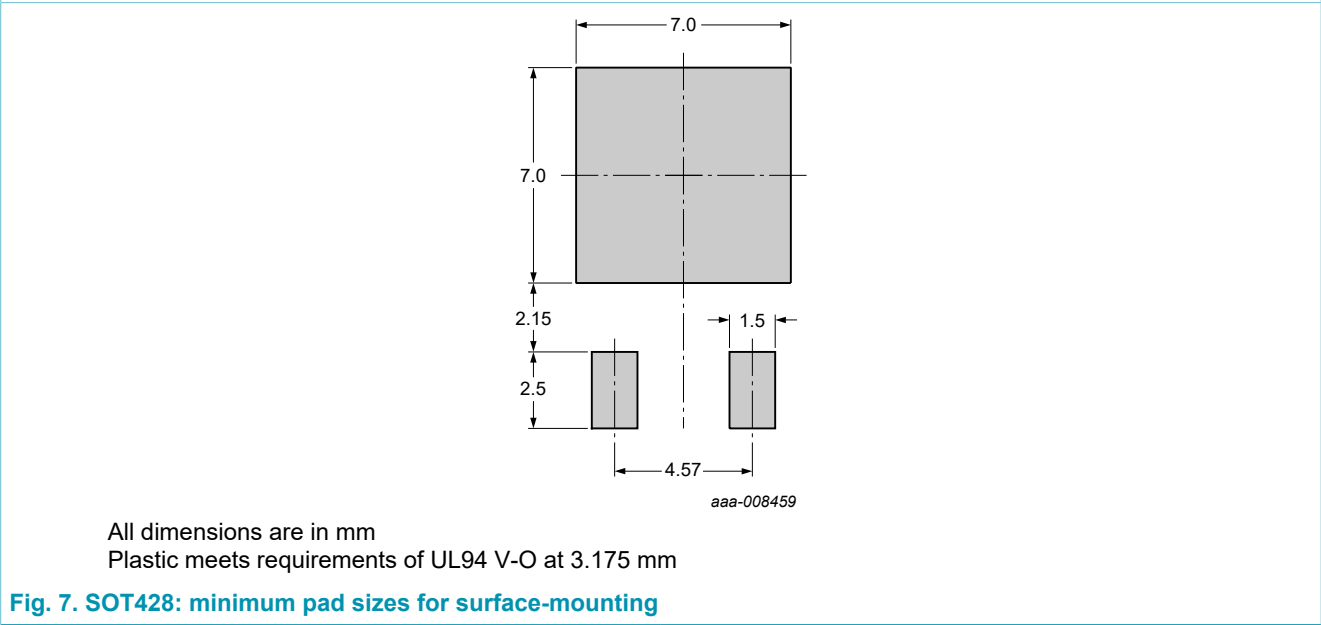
SOT428: minimum pad sizes for surface-mounting
